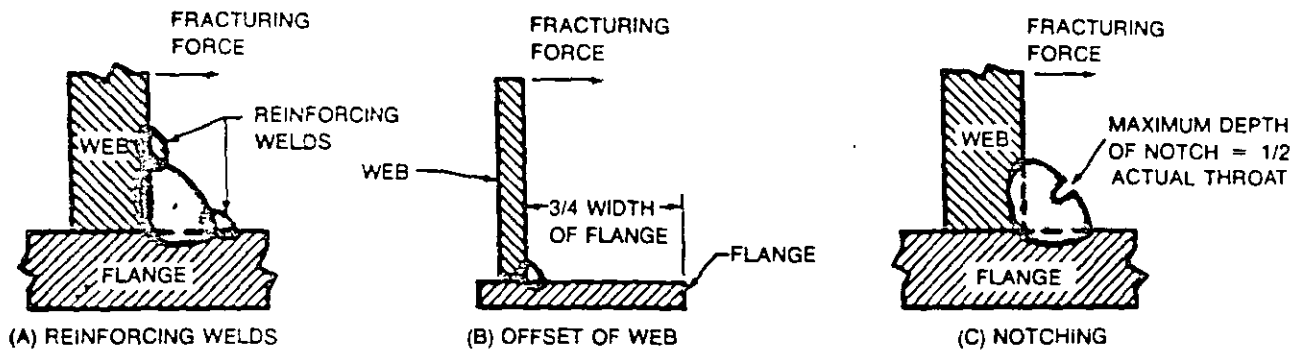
ALTERNATIVE METHODS FOR FACILITATING FRACTURE OF THE FILLET WELD
